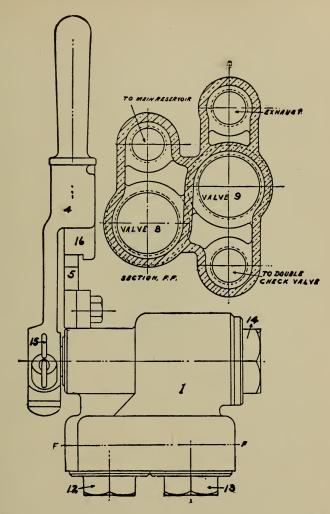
Brake Valve for Combined Straight Air and Automatic Engine Brake, Old Style.
